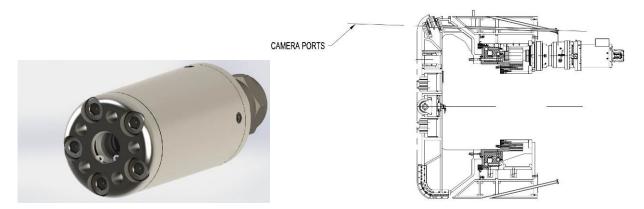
Face inspection camera (left) and camera ports in the cutterhead (right).
